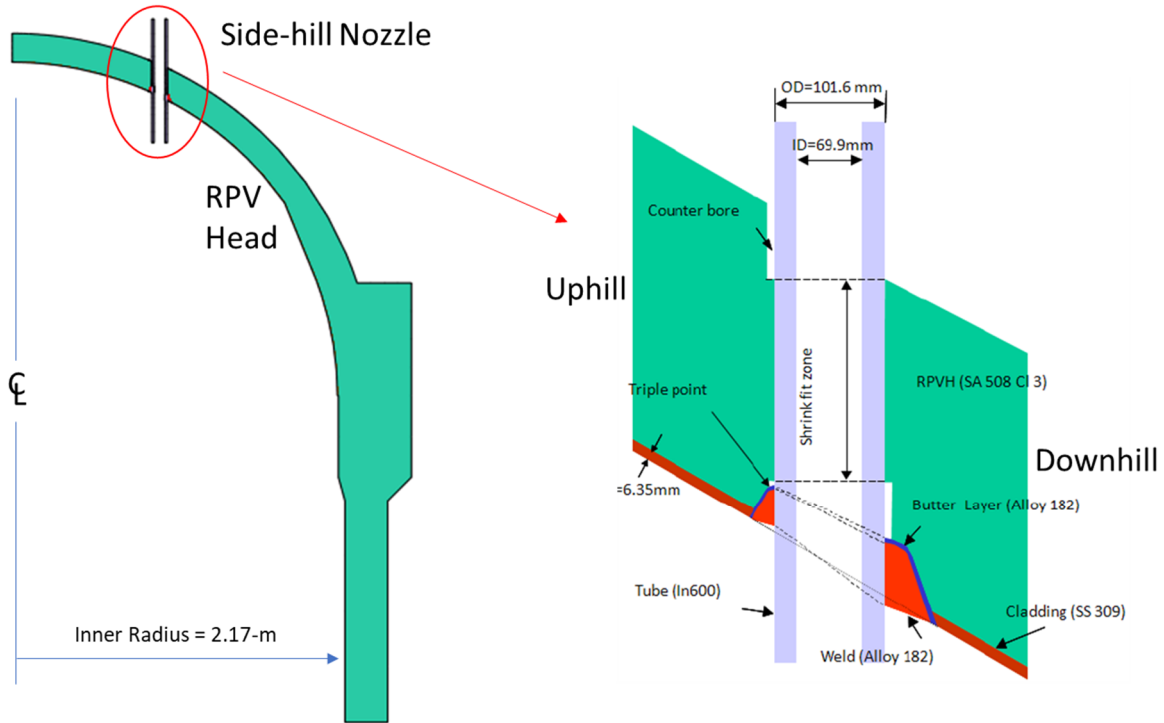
CRDM Head Segment with Hillside Nozzle Shown with Definitions of Material, Tube and Weld
